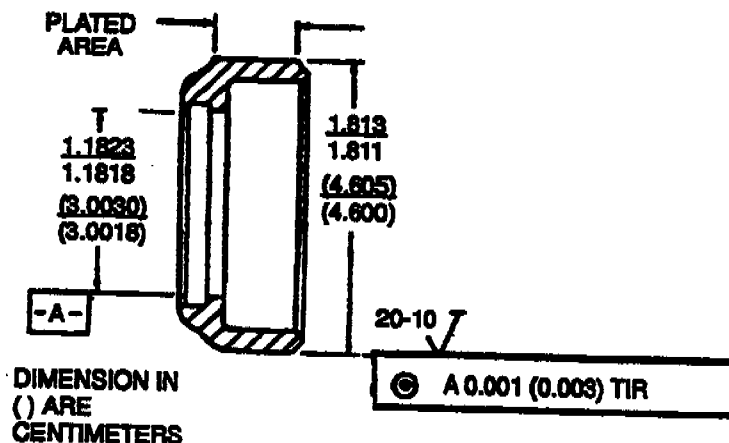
Plating Area - Starter Generator Drive Seal Spacer.
